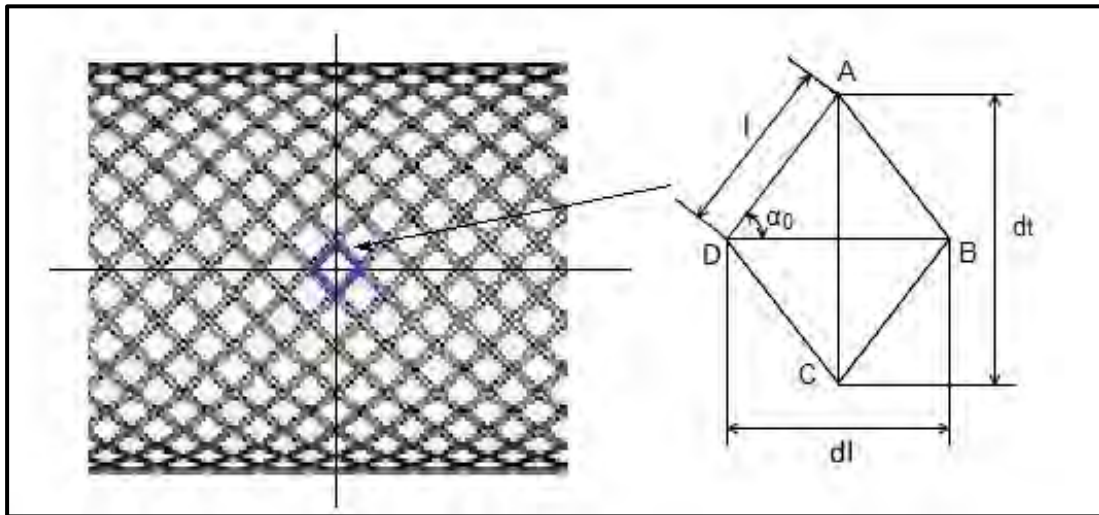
The mandrel's grooved surface showing the criss-cross pattern where a unit cell can be represented by a diamond geometry.
